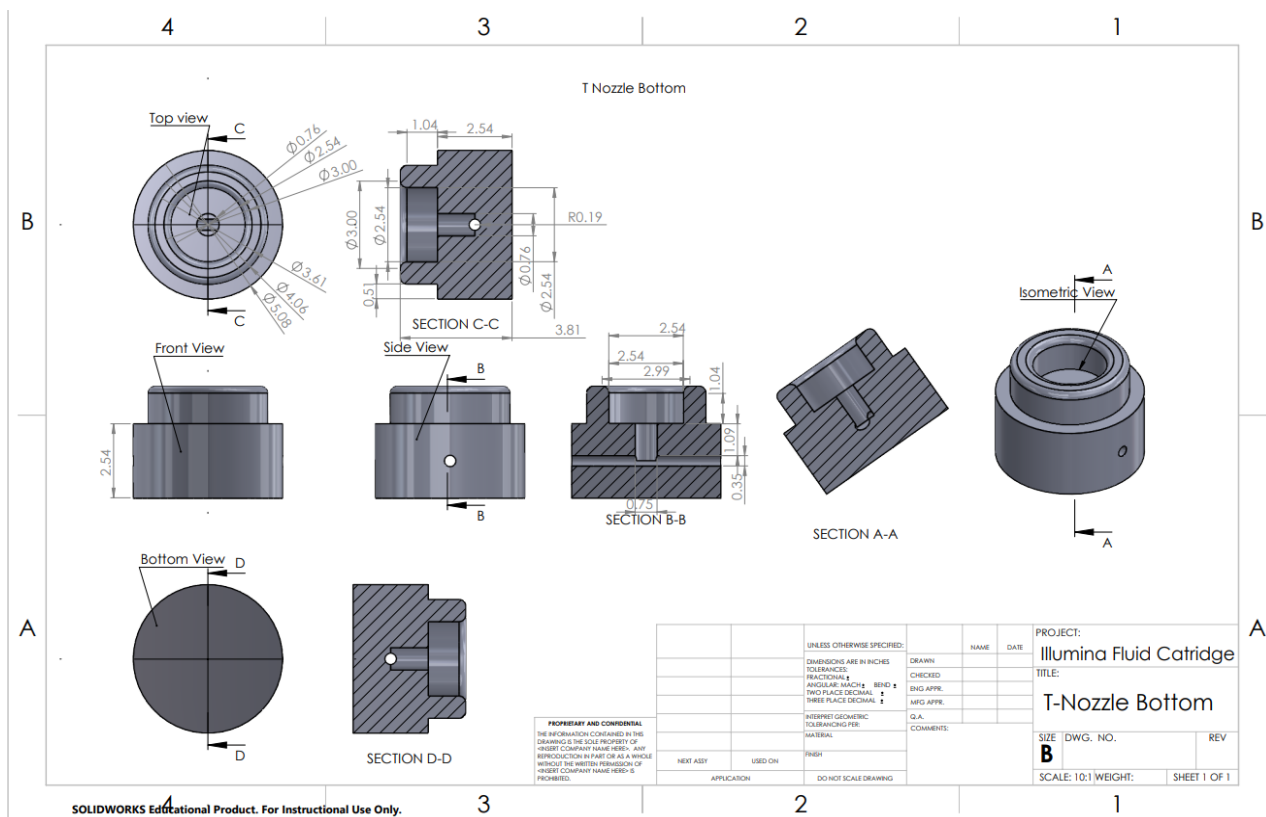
Technical drawing of the internal view of the T-nozzle bottom.
